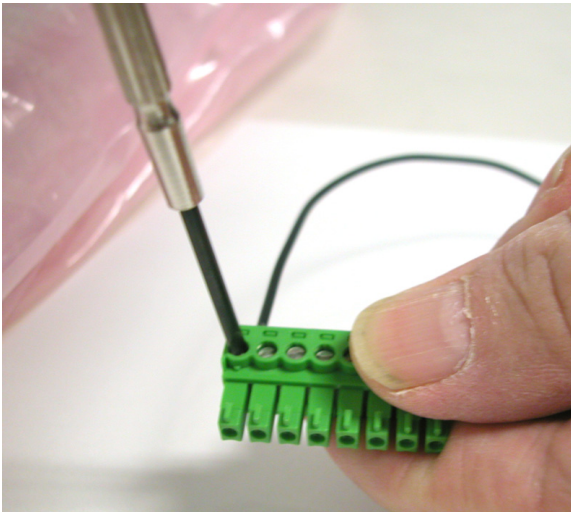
Use a Small Flatblade Screwdriver to Secure Connecting Cables
